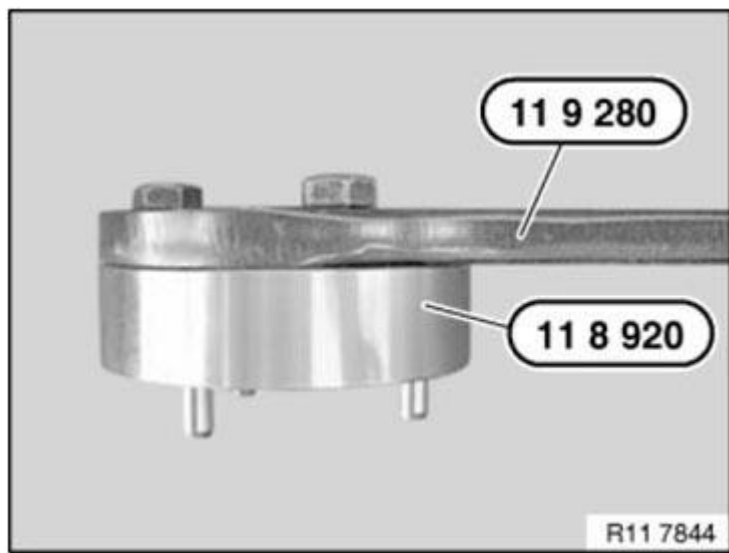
Fitting Special Tool 11 8 920 On Special Tool 11 9 280
